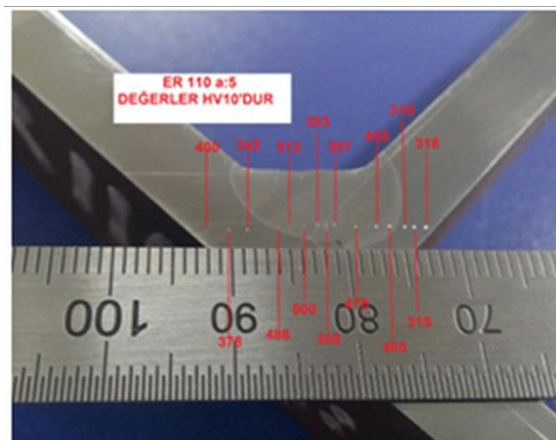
Hardness values of the sample with 3 mm welding height (bottom line)
